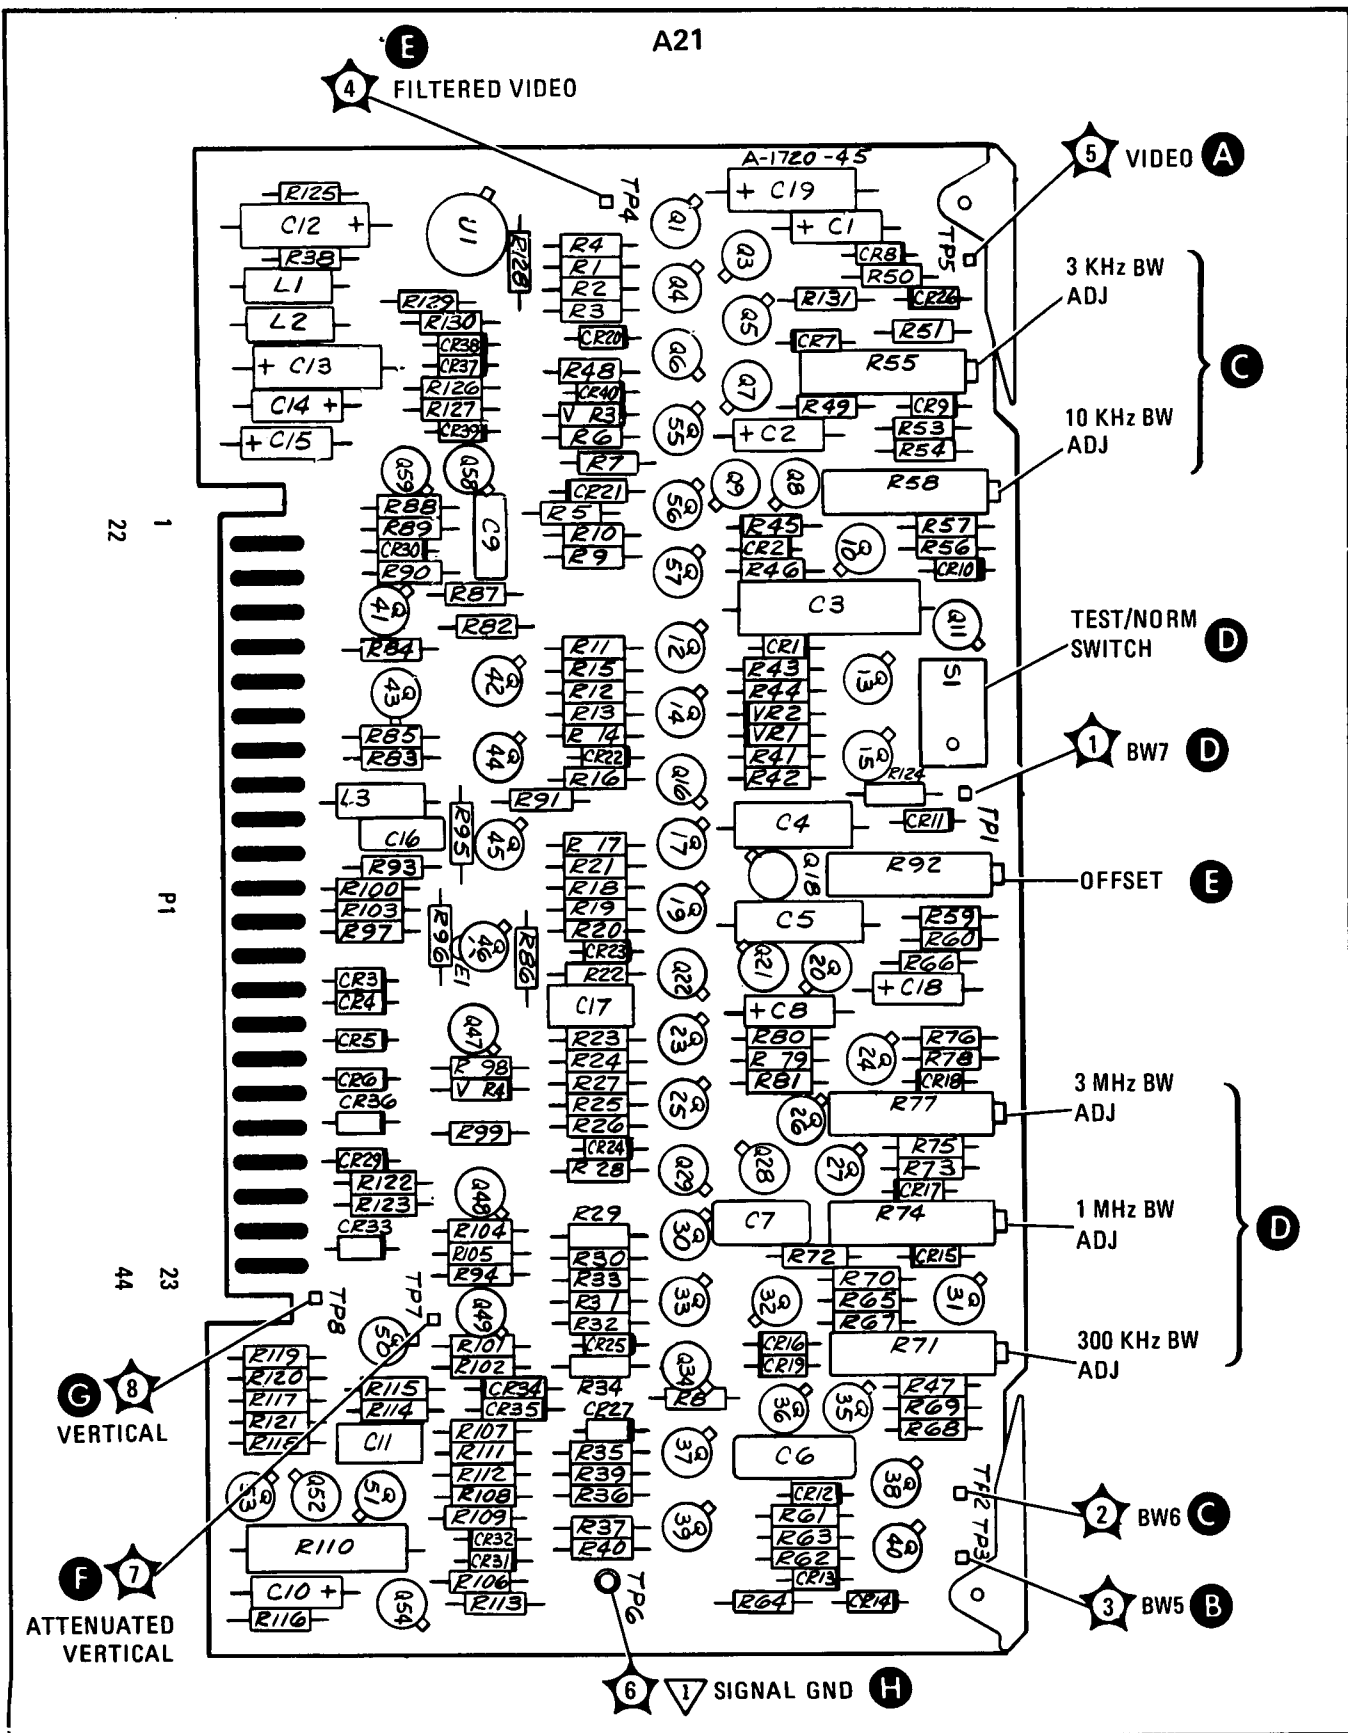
A21 Video-100 Hz Assembly, Component Locations
